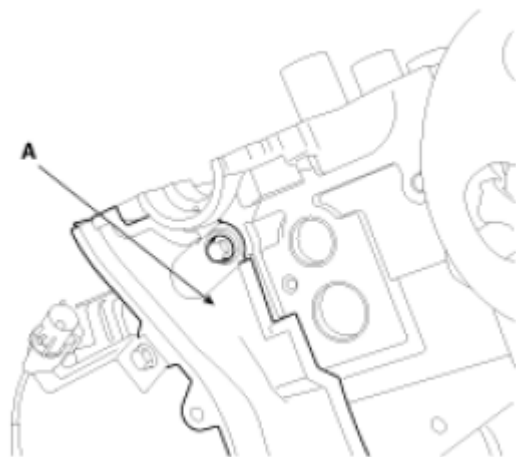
Identifying Bank 1 Timing Belt Rear Cover
